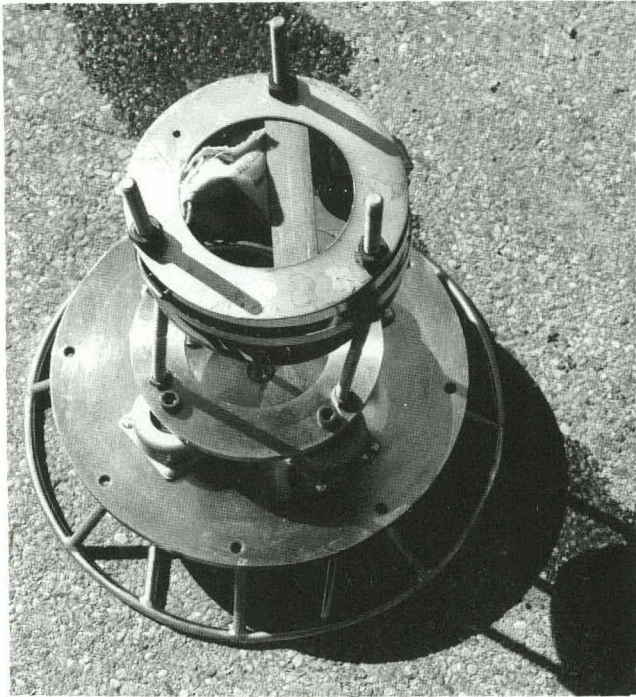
Free drop damage to clamping fixture, configuration-1. The three long rods were slightly bent on impact with 15 lb (6.8 kg) fastened near the ends of the rods.
